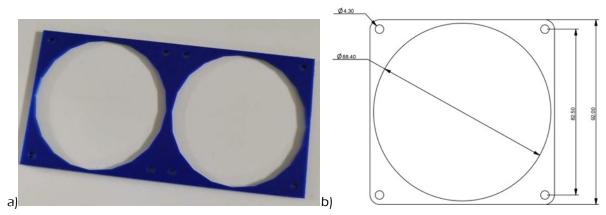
a) Picture of the designed and 3D printed bracket b) Technical drawing of standard 92mm fan spacing
